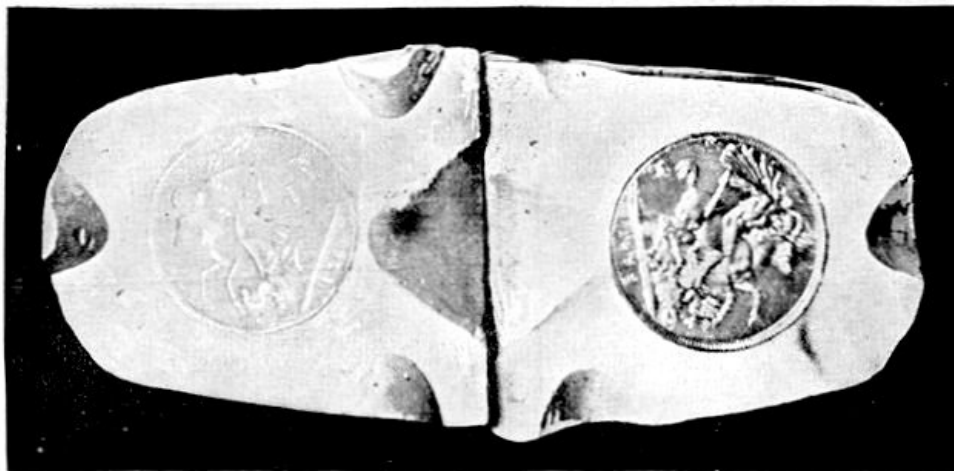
MOULD FOR FIVE-SHILLING PIECE.
